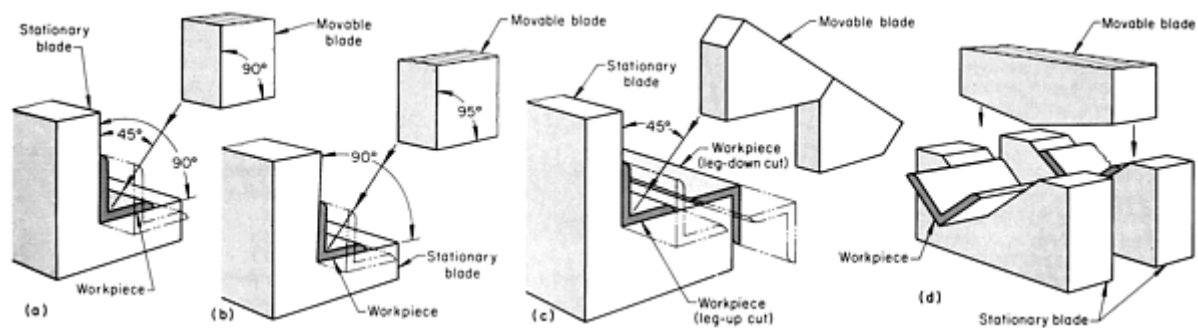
FOUR TYPES OF BLADES FOR THE CUTTING OF ANGLE SECTIONS. (A) TO (C) CUTTING IN A COMBINATION MACHINE. (D) DOUBLE-CUTTING METHOD
